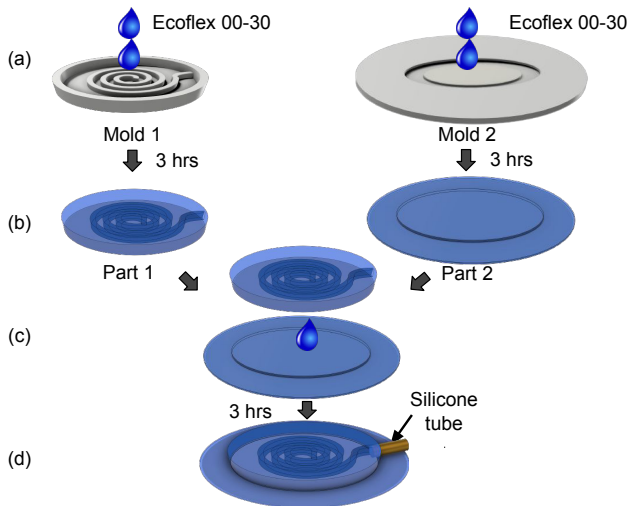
The process for fabricating a positive-pressure actuated suction cup includes (a) pouring Ecoflex 00-30 into the two molds, (b) removing the two soft parts after they are cured, (c) assembling the two parts together using Ecoflex 00-30, and (d) attaching a silicone tube used for supplying air to the pneumatic channel.
